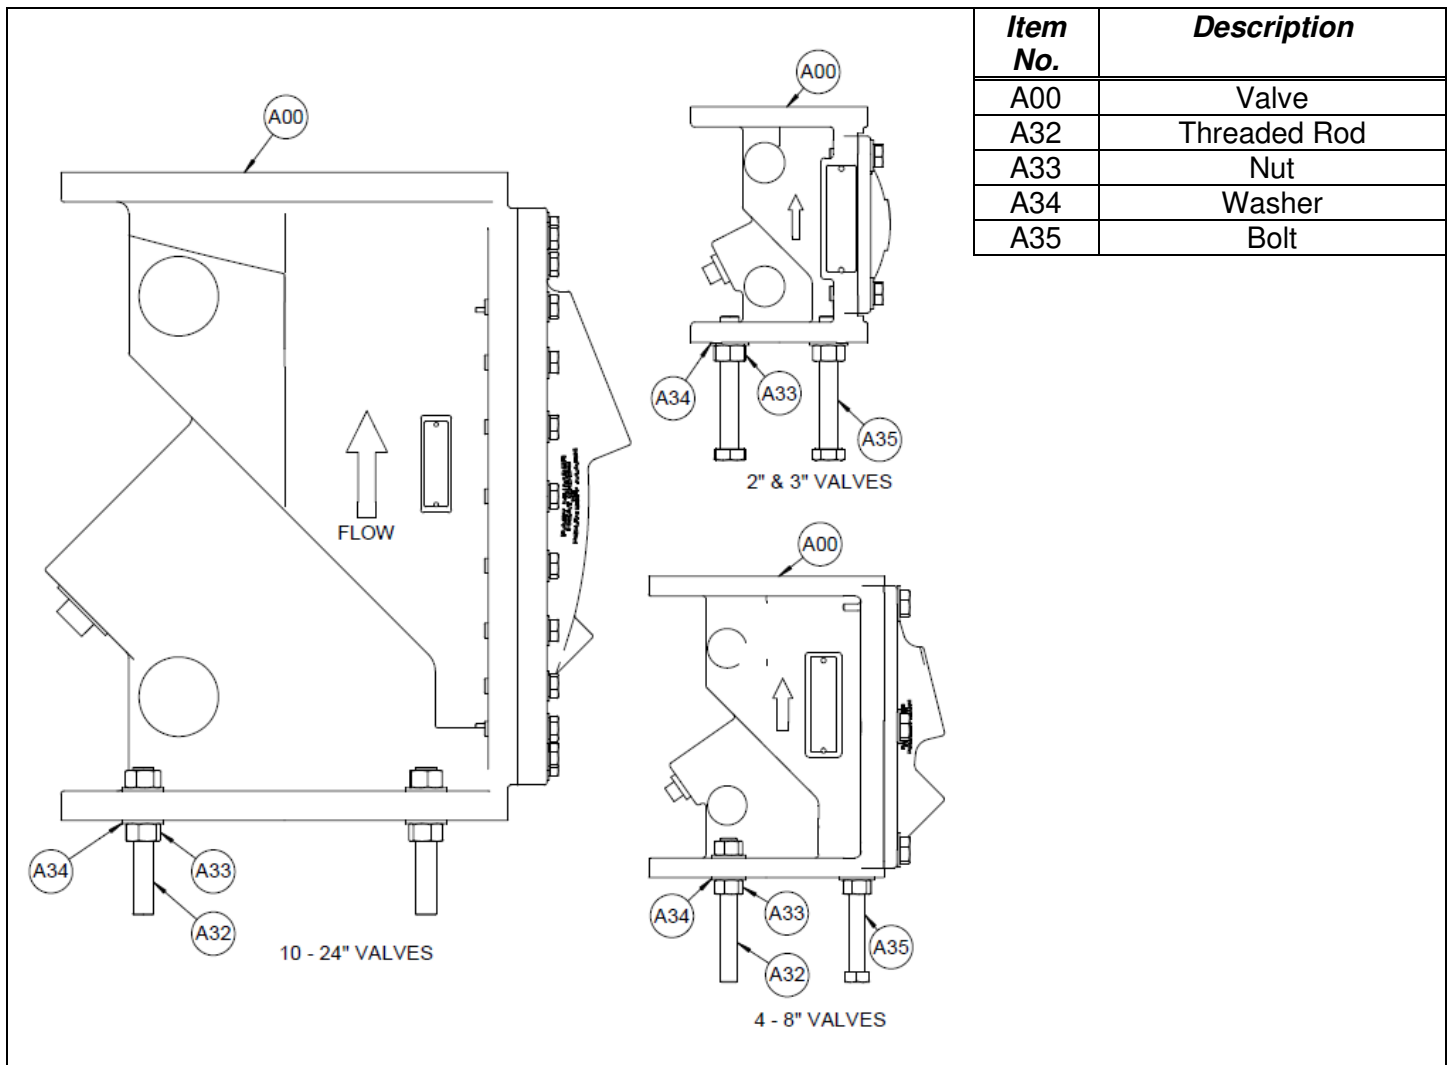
APCO FRF-100CF Rubber Flapper Foot Valve Standoff Assembly
